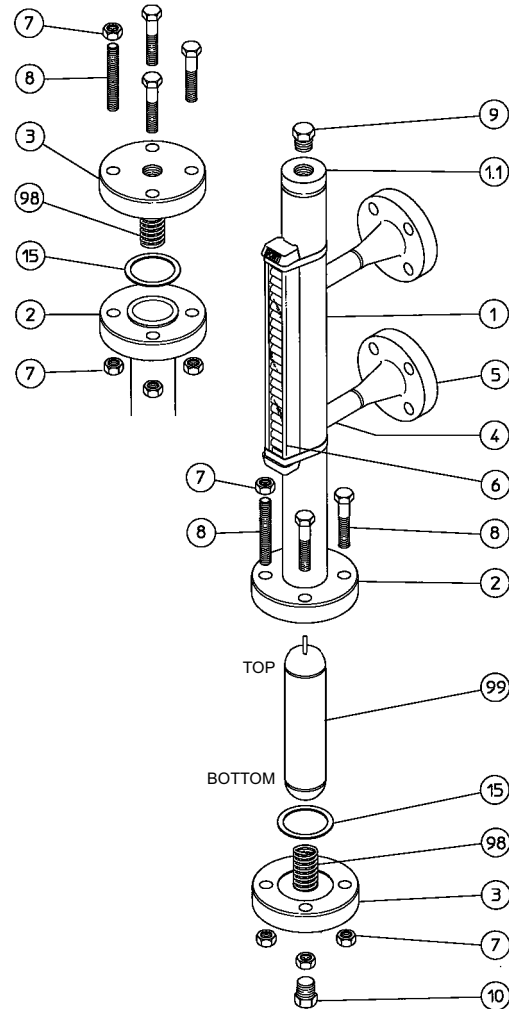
Magnetic Level Gauge Assembly typical dwg
